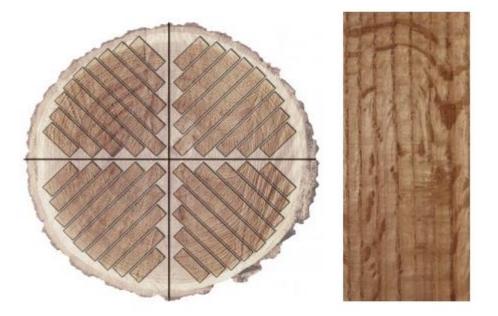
A quarter method of sawing (Sawing Options , n.d.)
